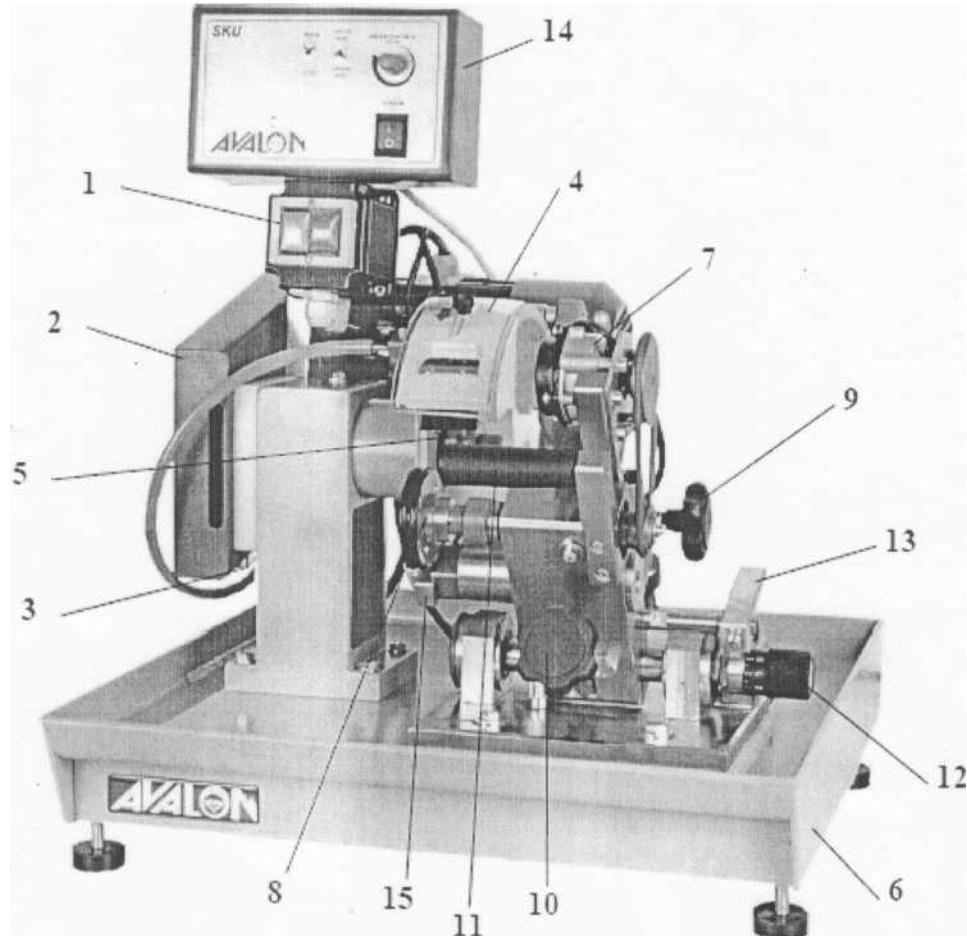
SKU machine of the Polish firm "Avalon" [20]: 1 - the control panel; 2 - protective cover of a wedge belt; 3 - the crane for water connection; 4 - protective cover for the profile circle; 5 - grinding wheel; 6 - machine bed; 7 - motor (12V) auxiliary; 8 - roller guide; 9 - the handle of adjustment of the size of balls; 10 - blocking the movement of the pendulum mechanism; 11 - the handle of the pendulum mechanism; 12 - adjusting screw for moving the pendulum mechanism; 13 - limit switch; 14 - control panel; 15 - support under the ball
